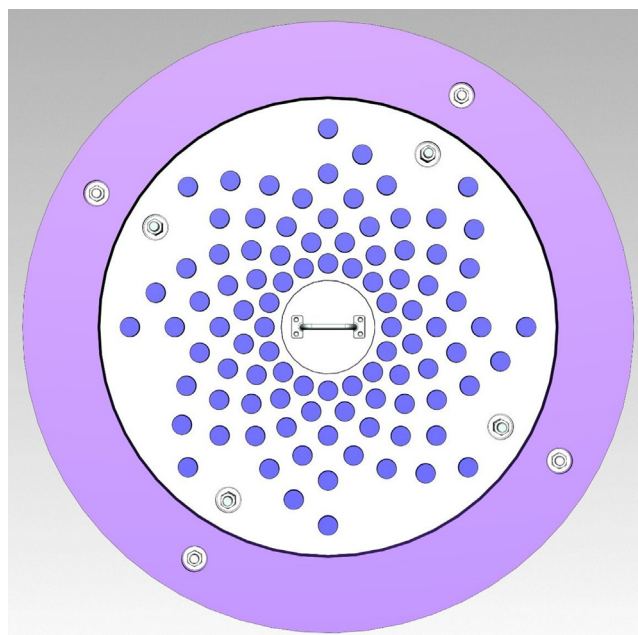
Top view of the final neutron detector system computer-aided design (CAD) assembly.
